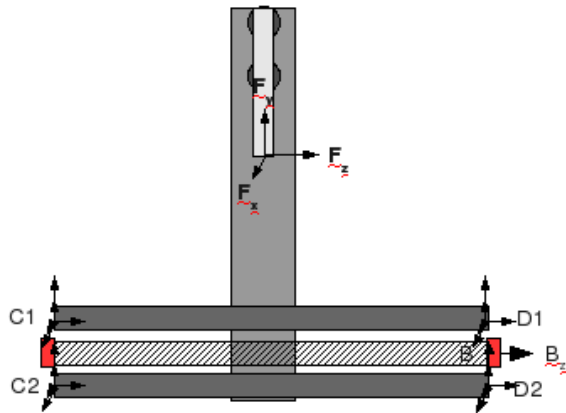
Loads on the bearings. The bearings (in red) will only have to support F_z as the linear shafts should help support the forces and moments in the other directions.
